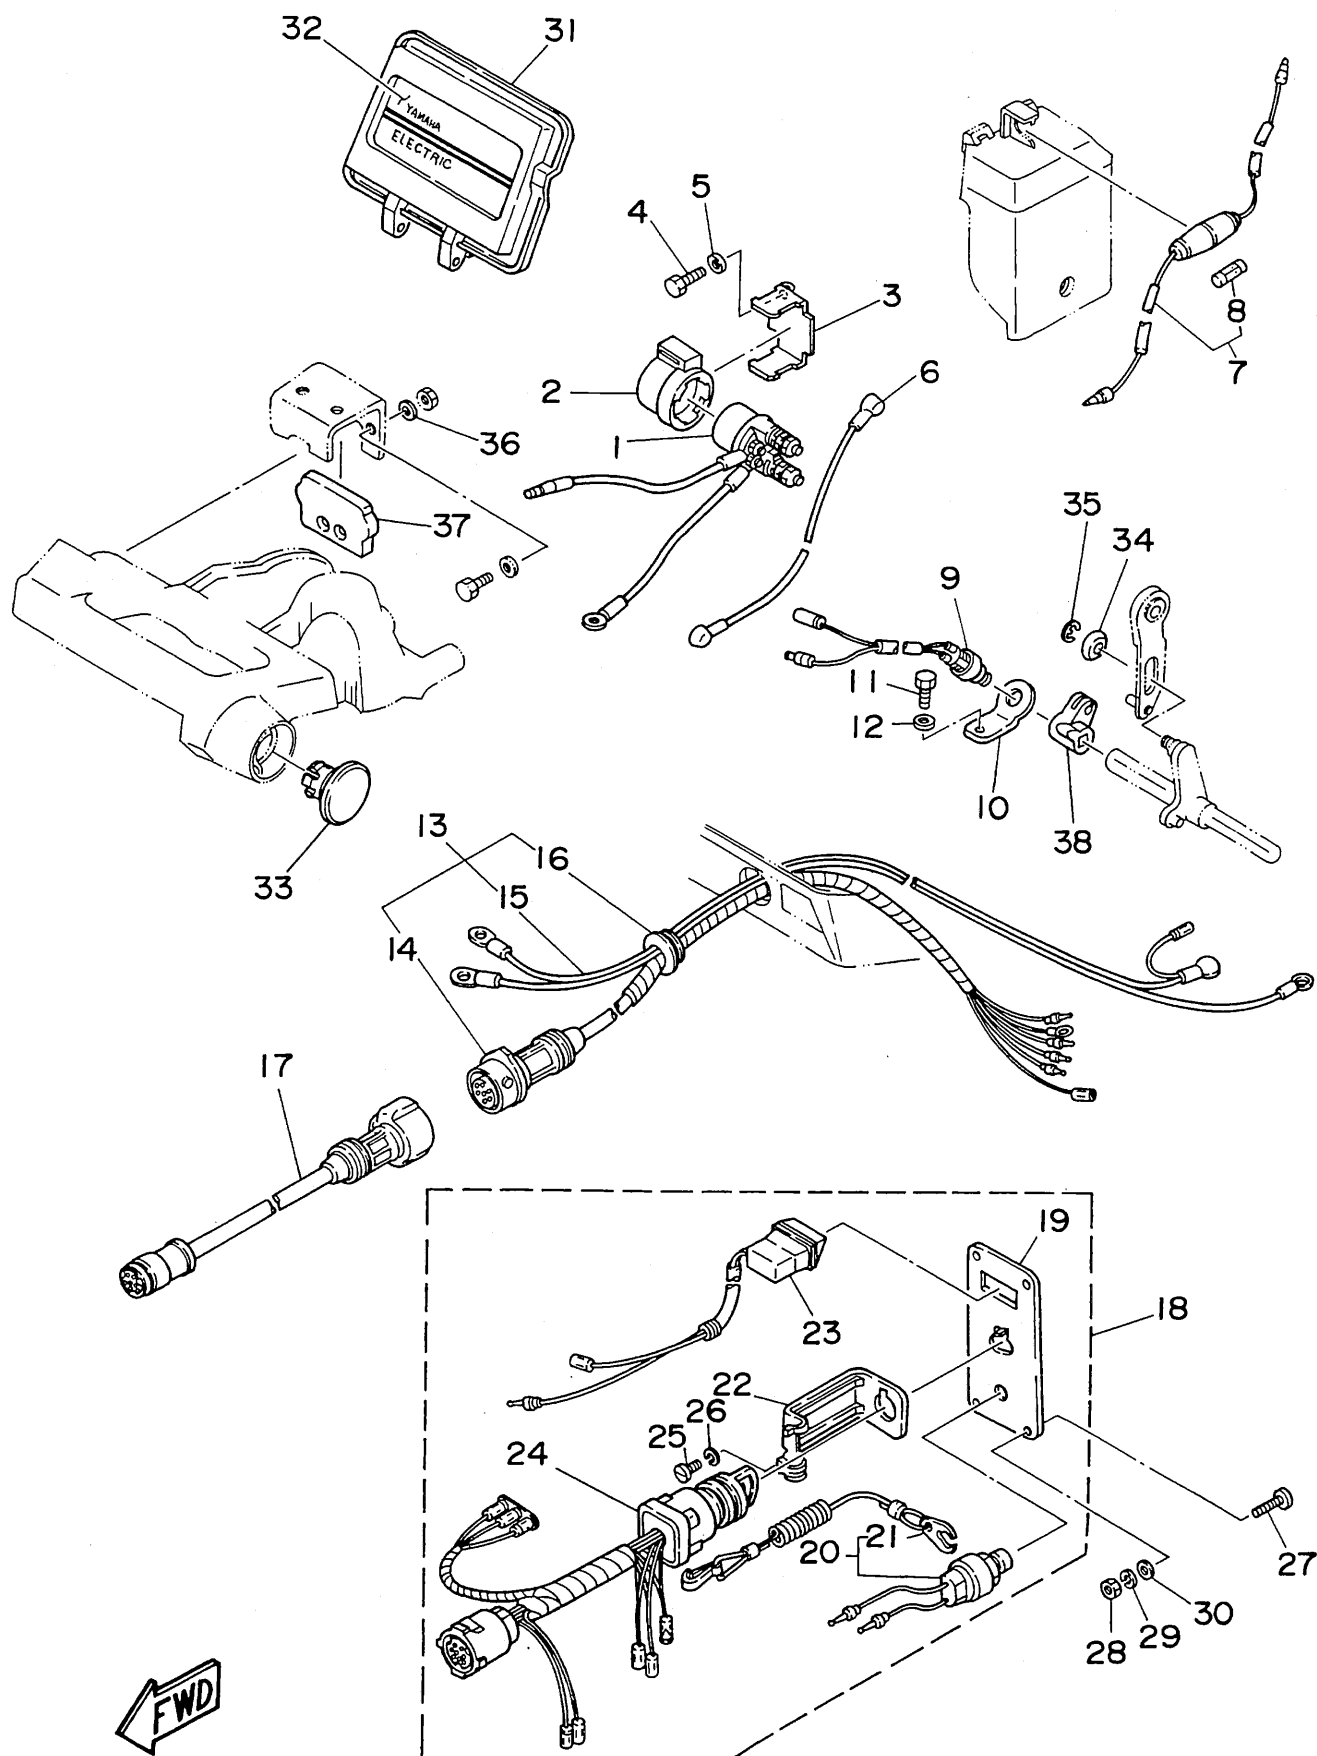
ELECTRIC PARTS 2 (F9.9AE MODEL)
